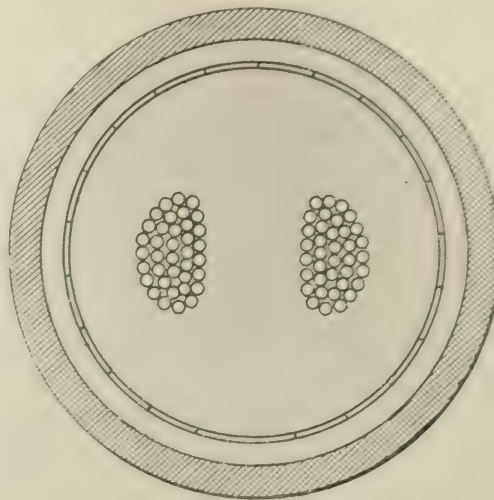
SECTION OF CABLE, FULL SIZE.
